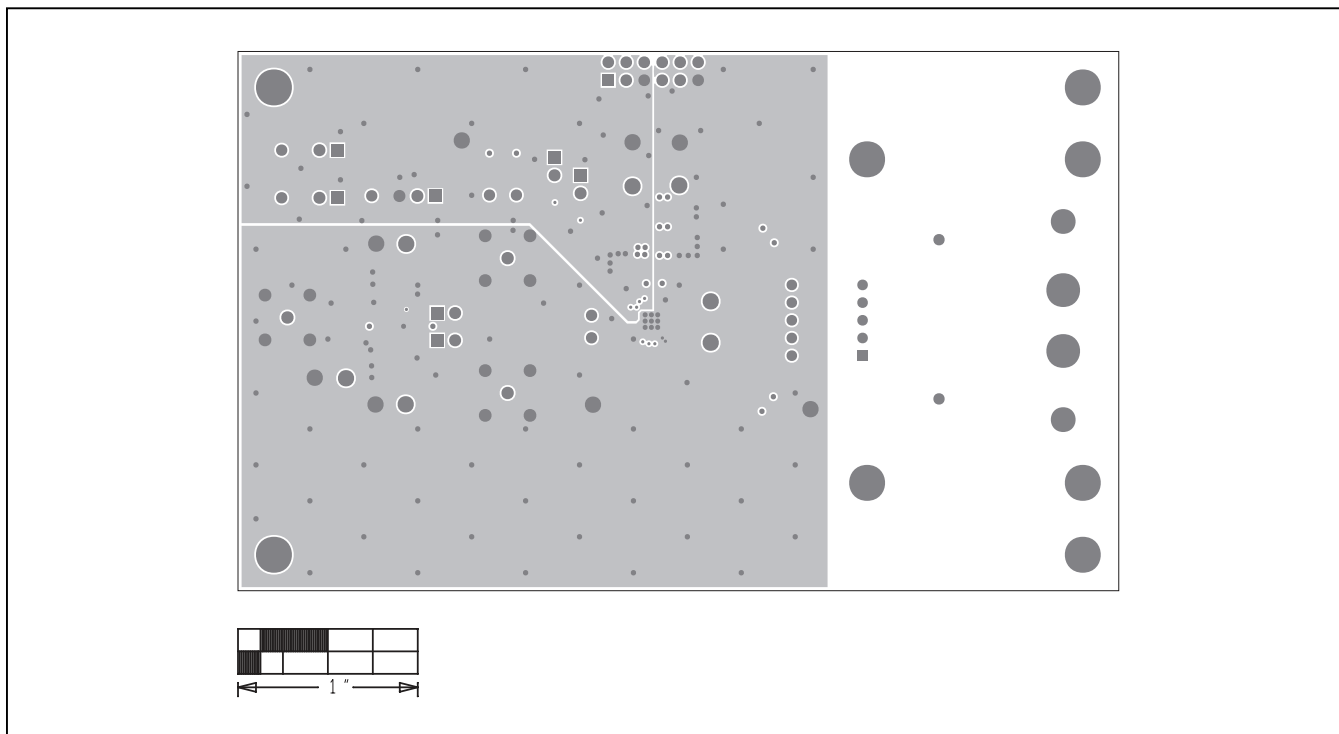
MAX44211 EV Kit PCB Layout—Inner Layer 2
